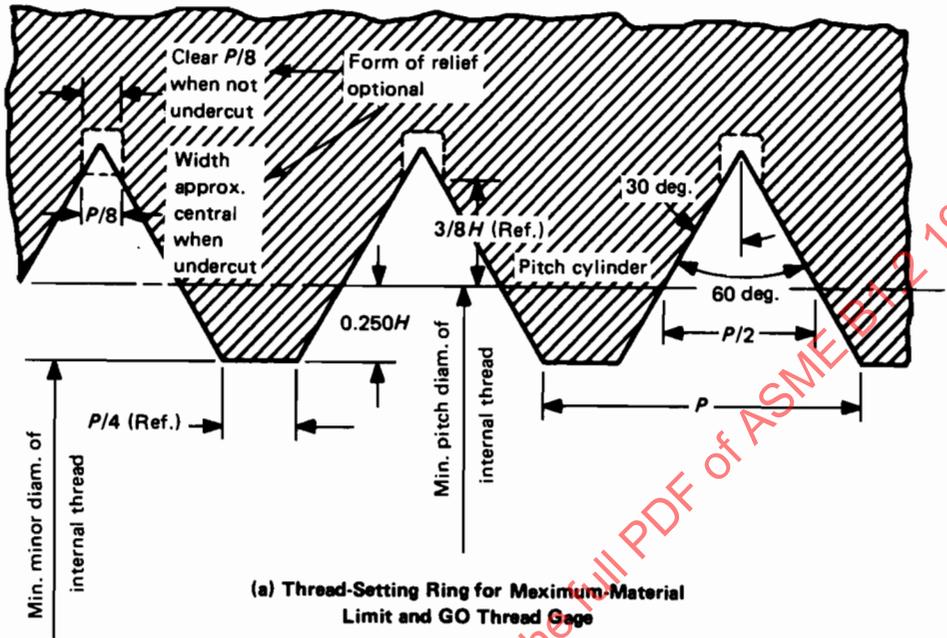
THREAD FORM OF SOLID THREAD-SETTING RING GAGES
